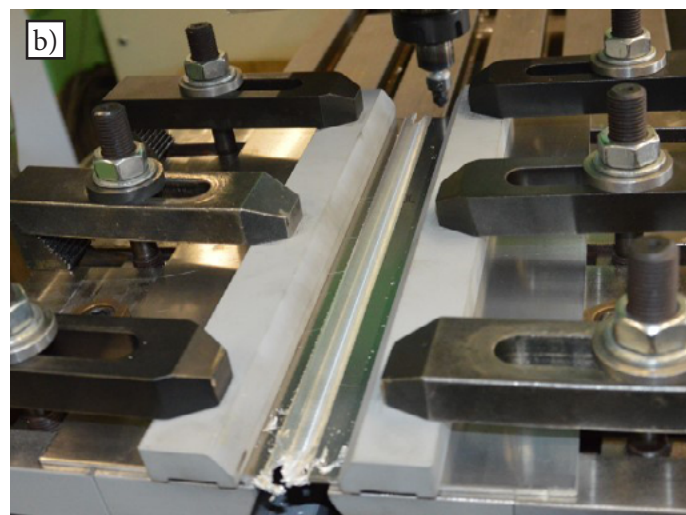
FSW station with the bobbin tool, a) main view and b) fixtures
